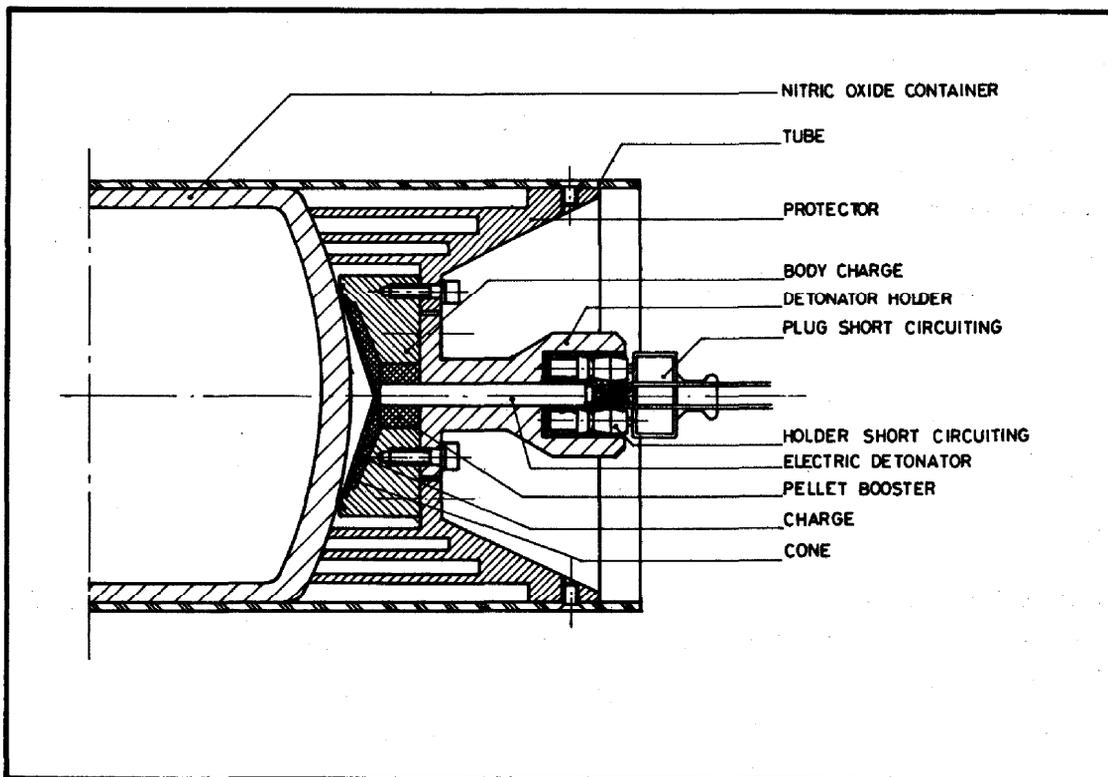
Cross-section drawing of the pyrotechnic opening system.
